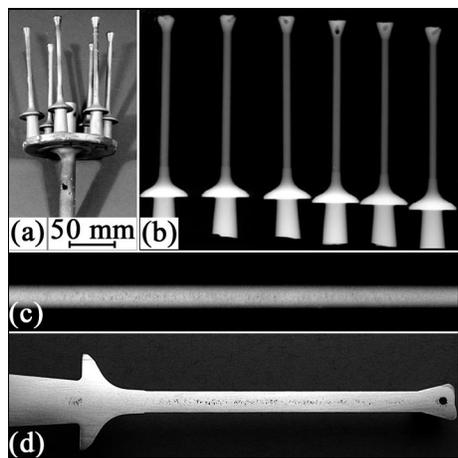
(a) Mould of TiAl valves produced by counter-gravity casting; (b) radiograph showing absence of major defects in valve heads and stems; (c) digitally-enhanced radiograph of stem of valve #3 showing mottling; (d) macro-section through valve showing centreline interdendritic porosity. (NB the holes in the ends of the stems are in a 'flow-off' and not part of the final valve.)
